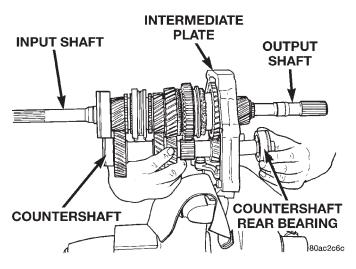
Remove Countershaft and Countershaft Rear Bearing
